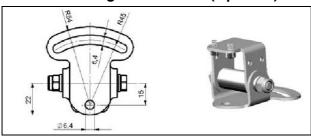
Stainless steel mounting base, adjustable in two axes, part number: TM-MB-TIM
